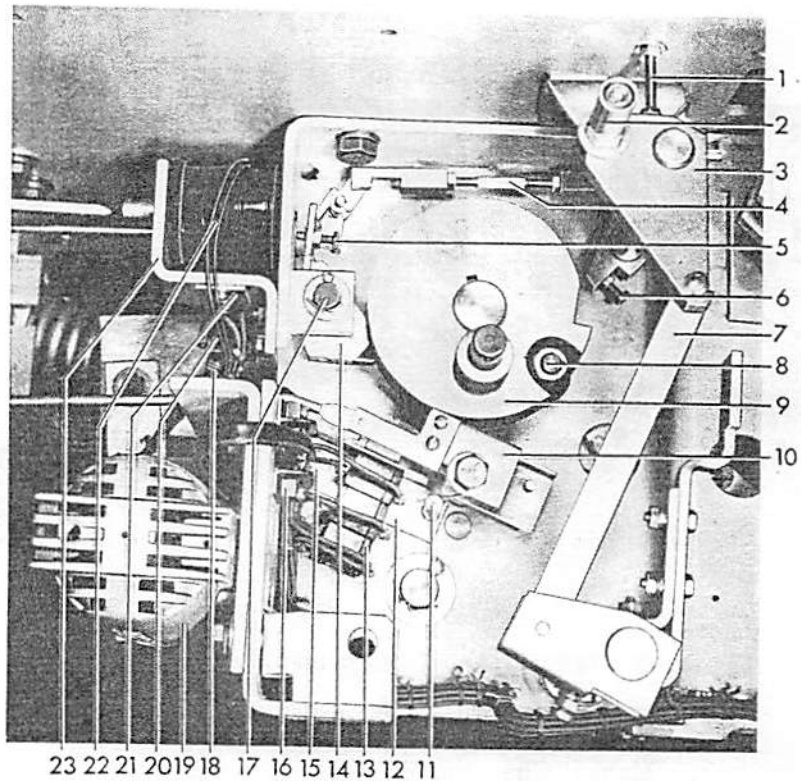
(8037379) Control Mechanism and Spring Discharge Link
